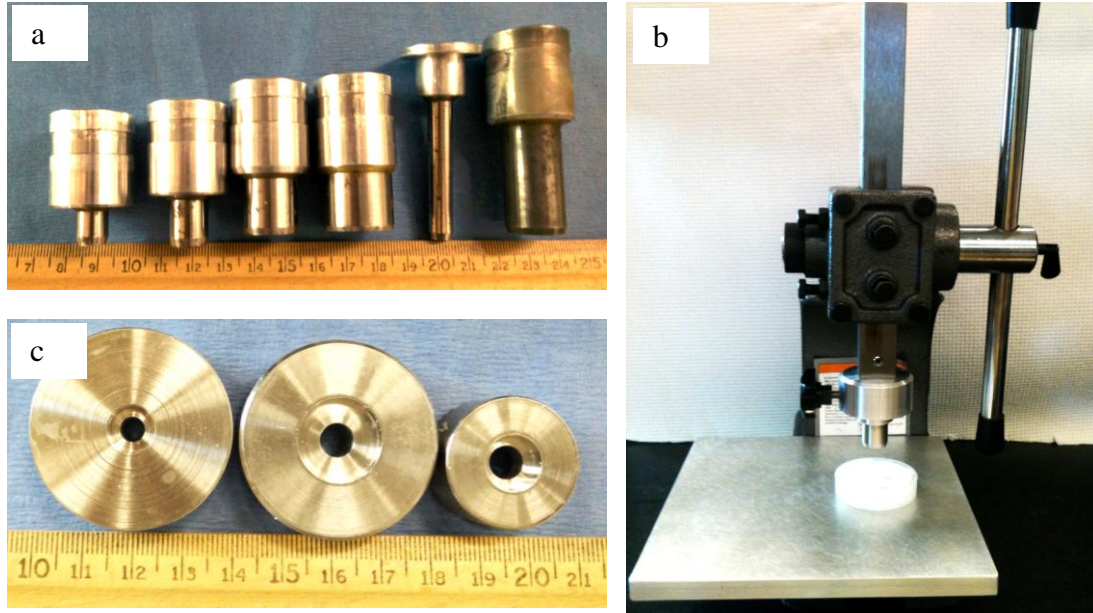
Custom-designed scaffold cutting tool consist of (a) stainless steel punches of various sizes, (b) a modified arbor press, (c) cutting molds of various sizes.
